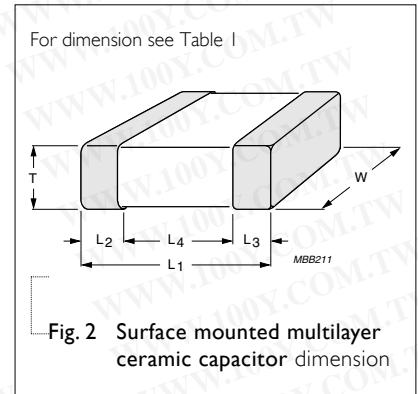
Surface mounted multilayer ceramic capacitor dimension
